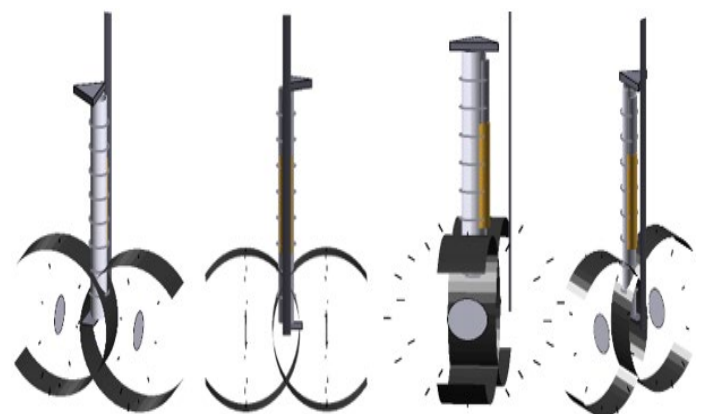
Design of Landing Gear Strut Assembly in Aerospace Applications
